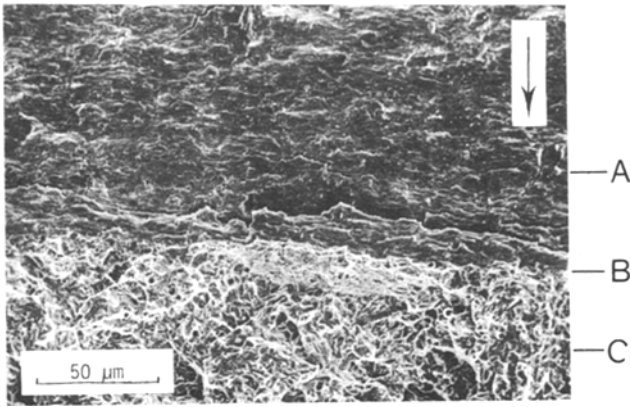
Detail of Fig. 1 showing branch cracks near the crack tip. (Mode III fatigue fracture surface – A, fatigue crack tip – B, impact final fracture at LN₂ – C). Arrow shows the crack growth direction.
